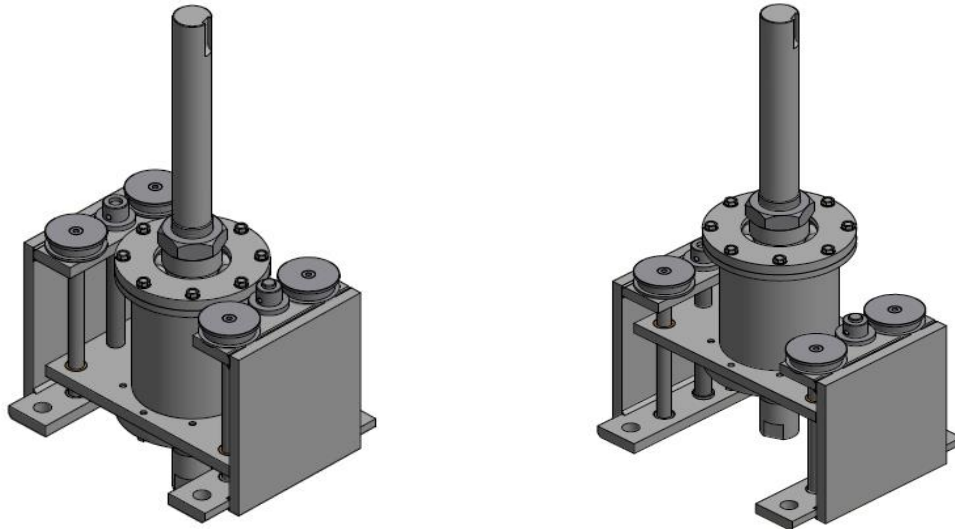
Fan bearing housing 3D model at the two positions (without the chain drive)
